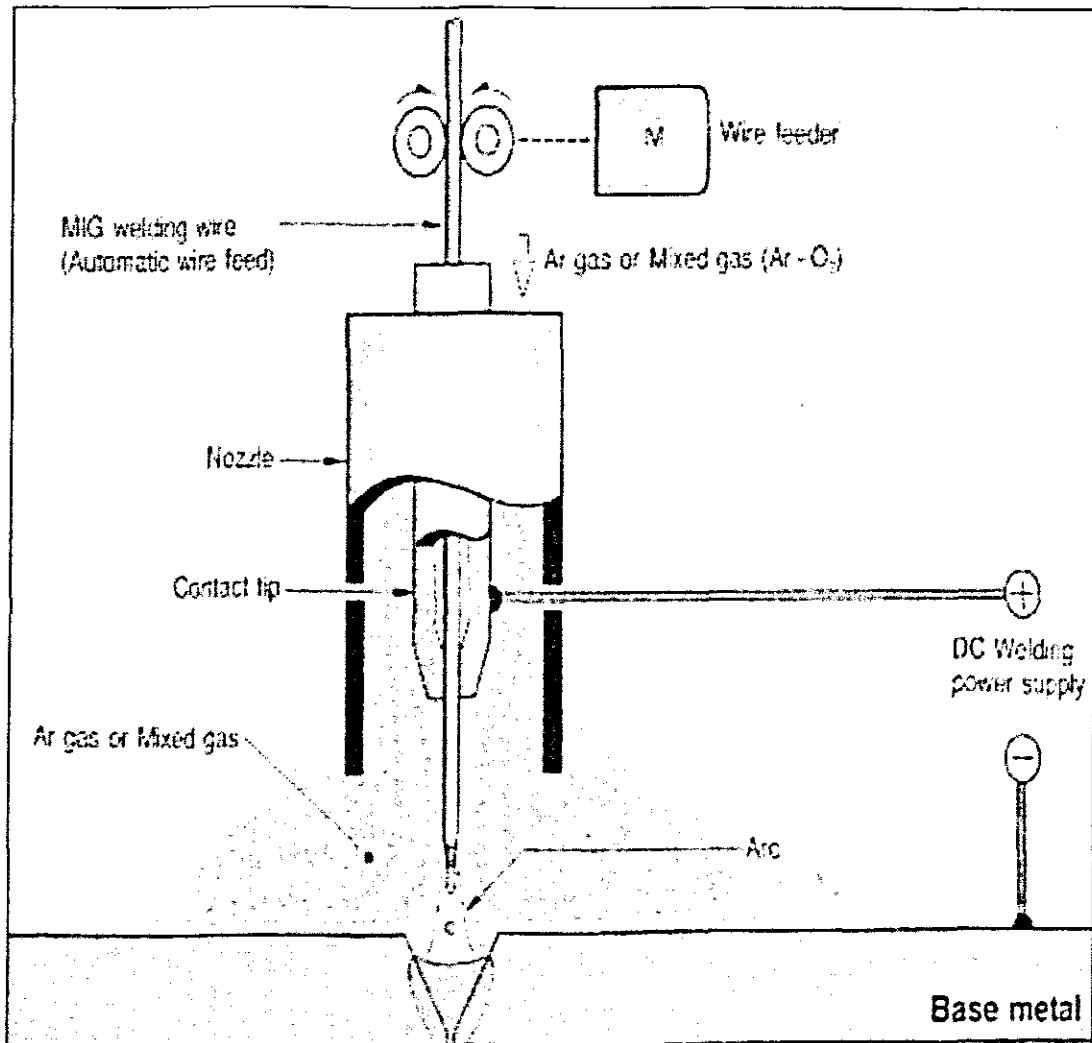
(b) The GMAW Process. Reprinted from Operation Guide, CO₂MAG Semi-Automatic Welding Machine [44].
